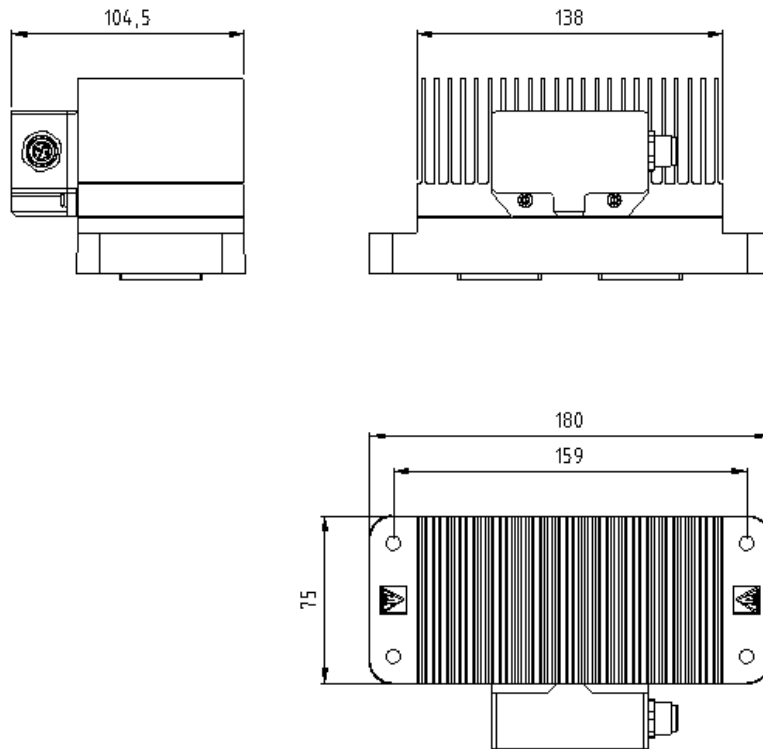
InduEye® TG Duo module - Dimensions in mm
